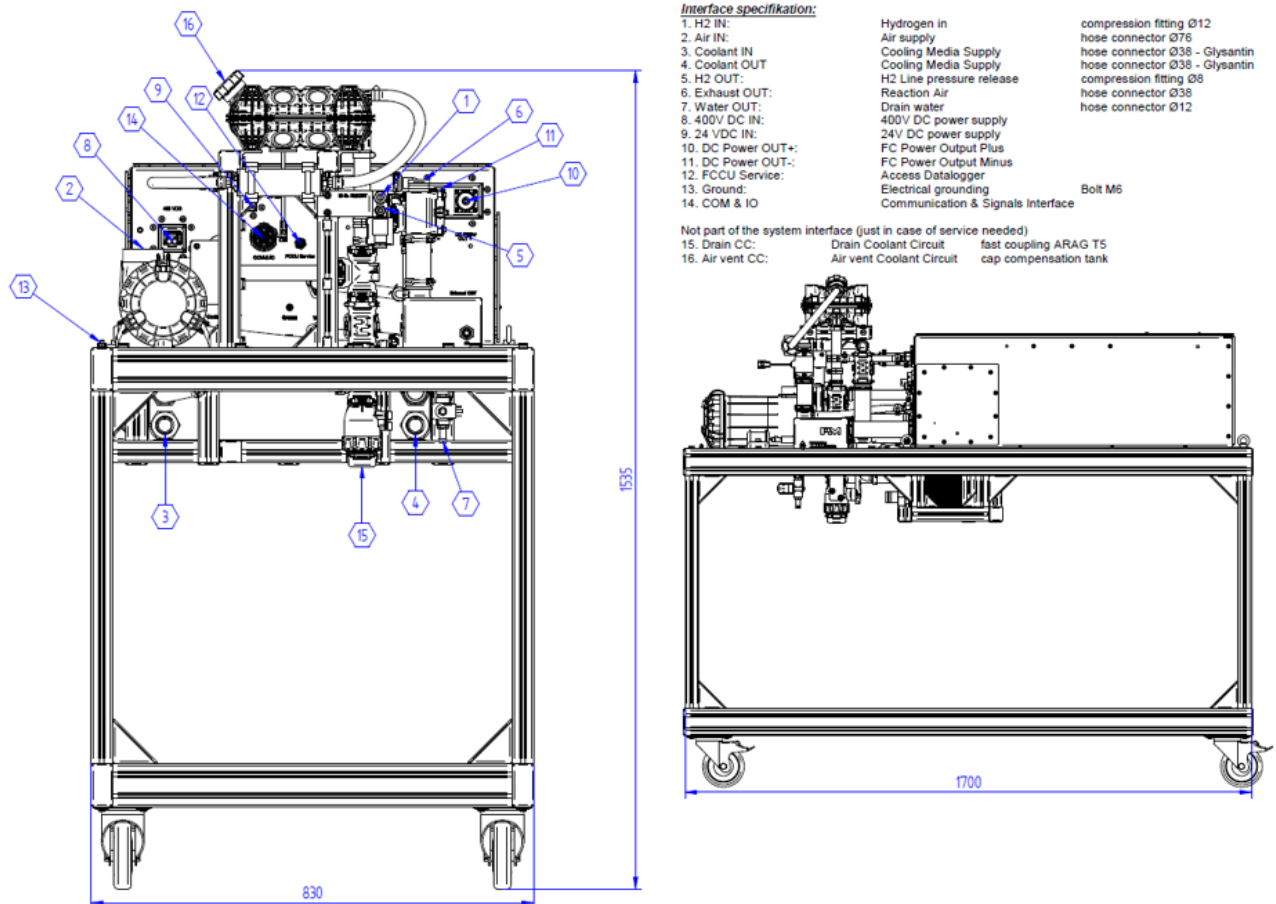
Drawings of the complete benchtop system with the FCM Module built for testing
